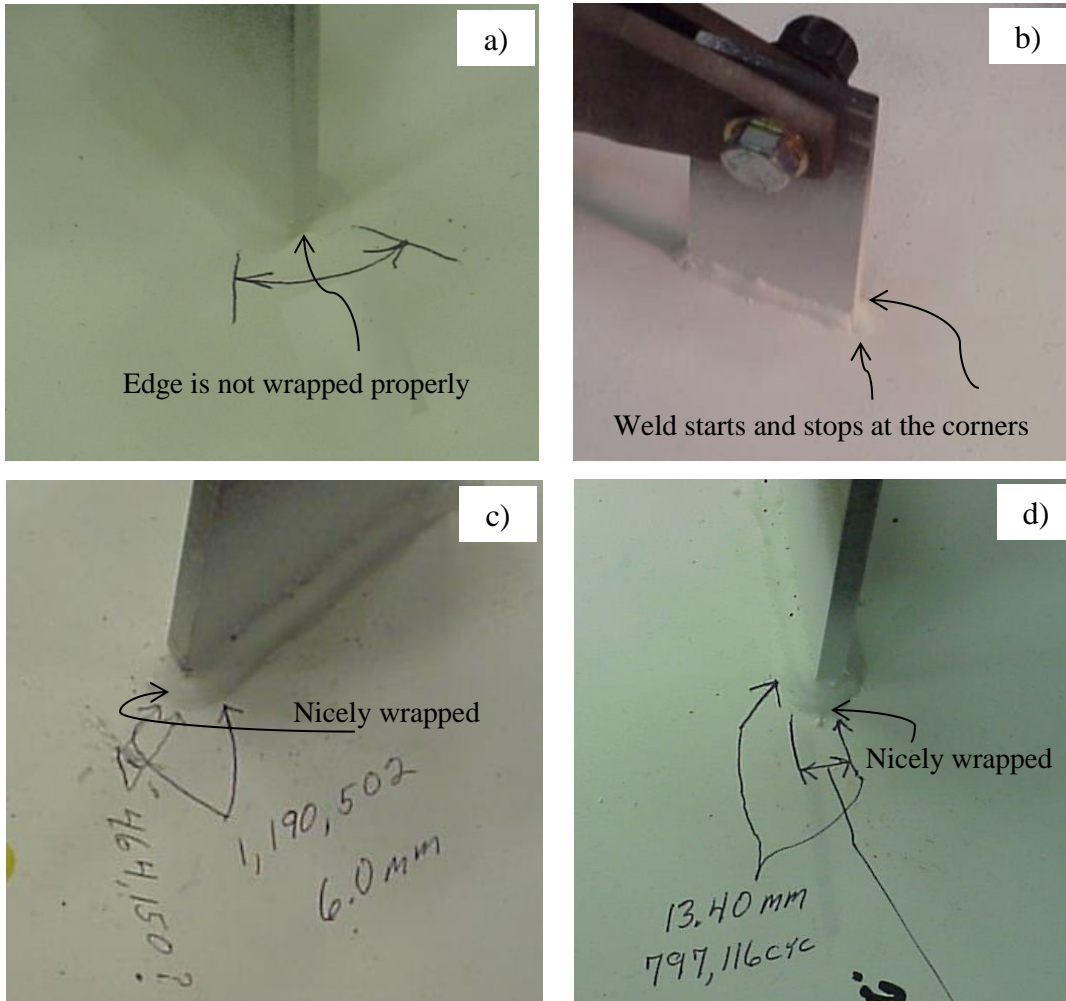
Manufacturing variability in the welded samples (a) Weld deposit missing around the gusset edge (Sample RE#3) (b) Weld deposit at the gusset edge using tack weld, causing weld starts and stops at the corners (Sample#15) (c) Nicely wrapped weld around the edge with no starts and stops in the corners (Sample#16) (d) Another sample with nicely wrapped weld around the edge (Sample#18)
